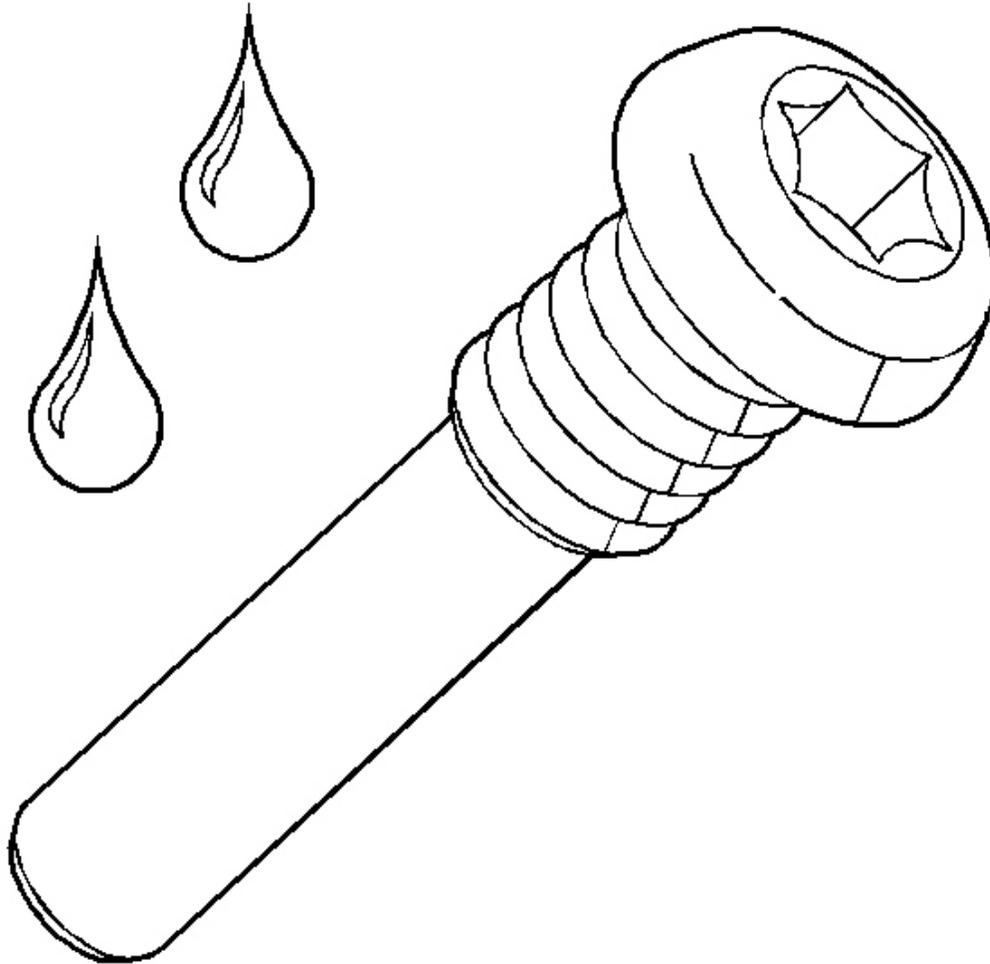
Applying Sealer To Shift Lever Guide Bolts Threads
